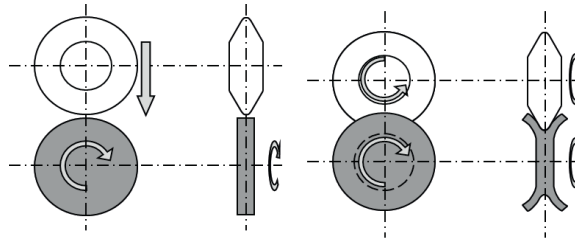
Rotary splitting of a circular disk using a driving blank and a driven forming roller.
